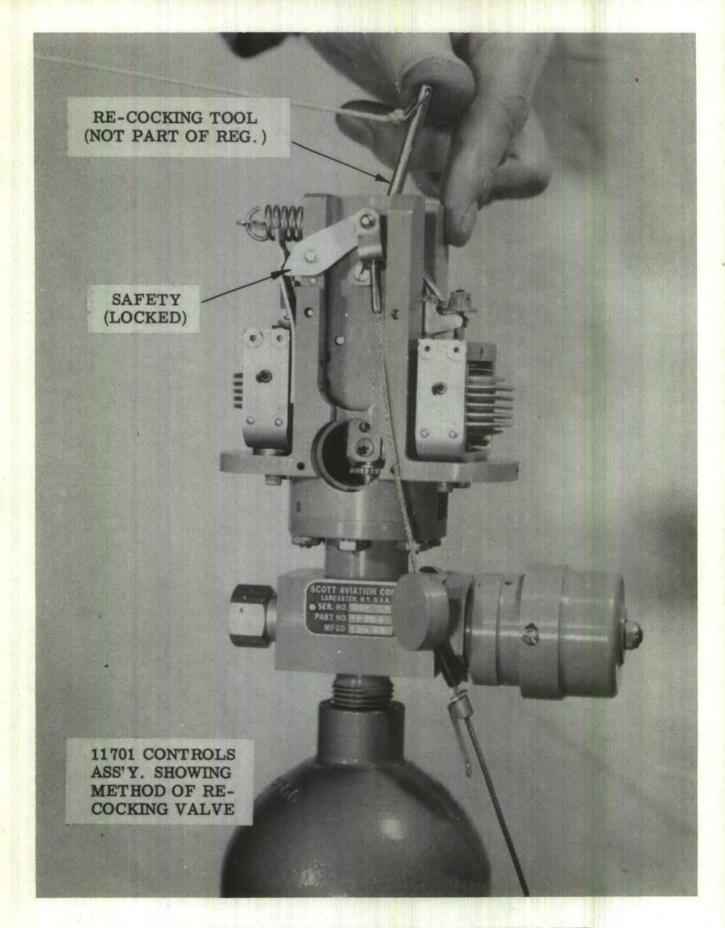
11701 CONTROLS ASS'Y. SHOWING METHOD OF RECOCKING VALVE
